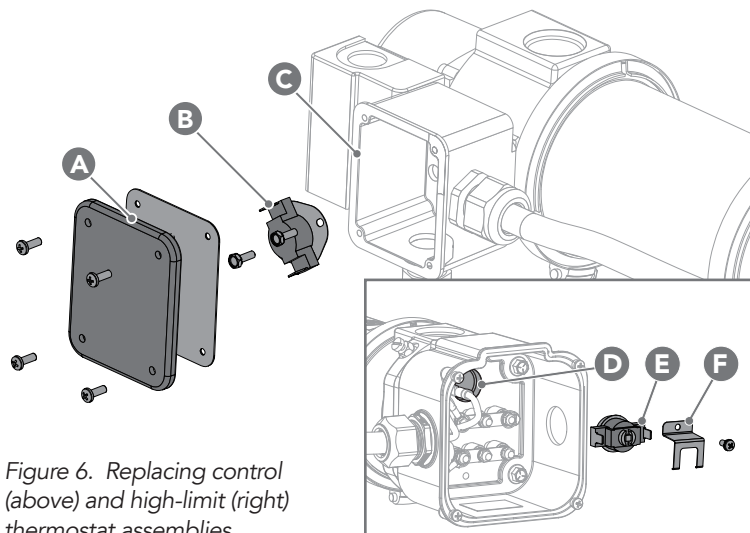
Replacing control (above) and high-limit (right) thermostat assemblies.
